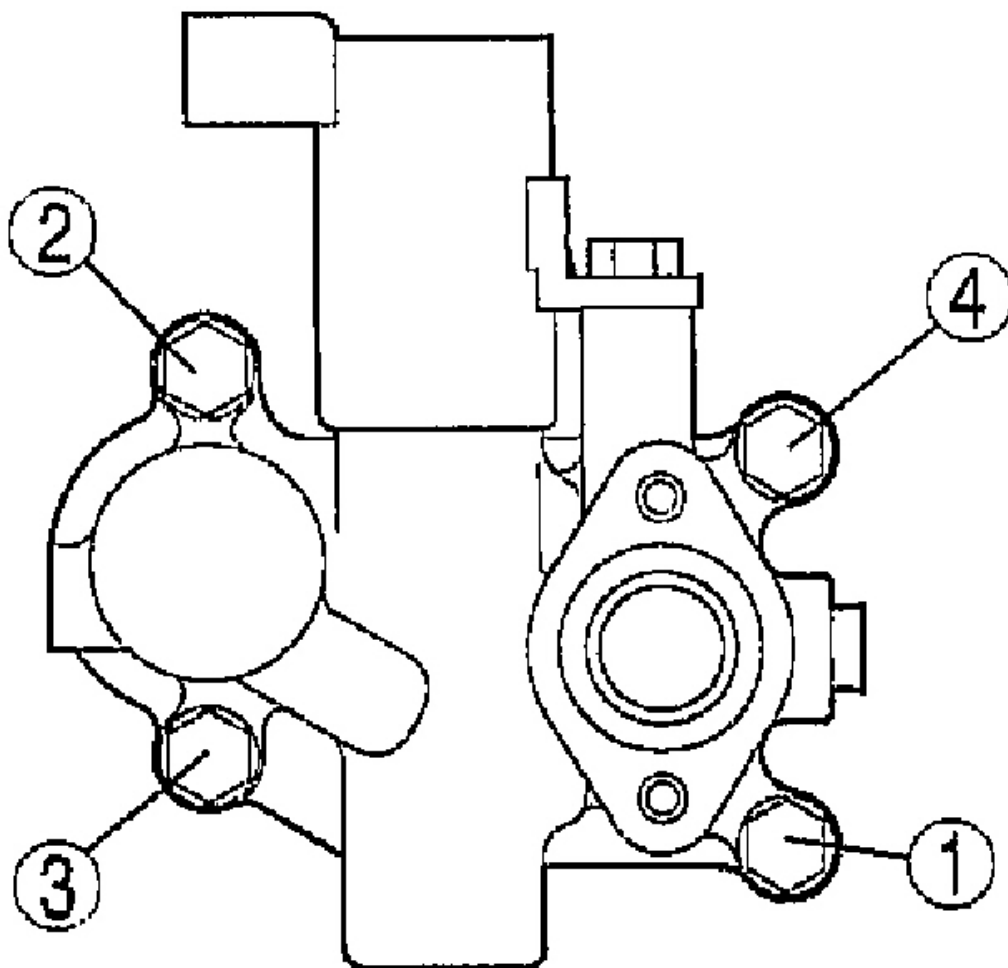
Tightening Sequence Of Cylinder Head Cover Bolts
